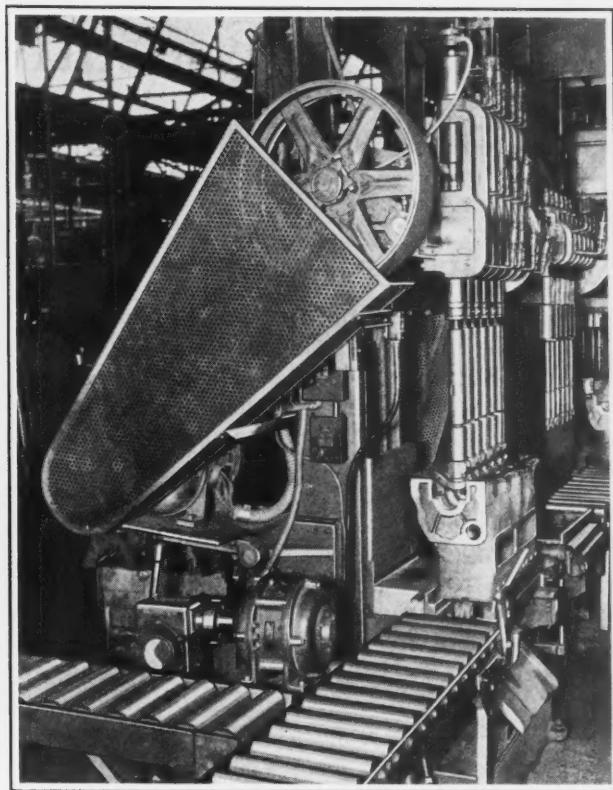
The Cutters Used in this Machine for Chamfering the Cylinder Bores Must be Stopped in a Certain Angular Position
